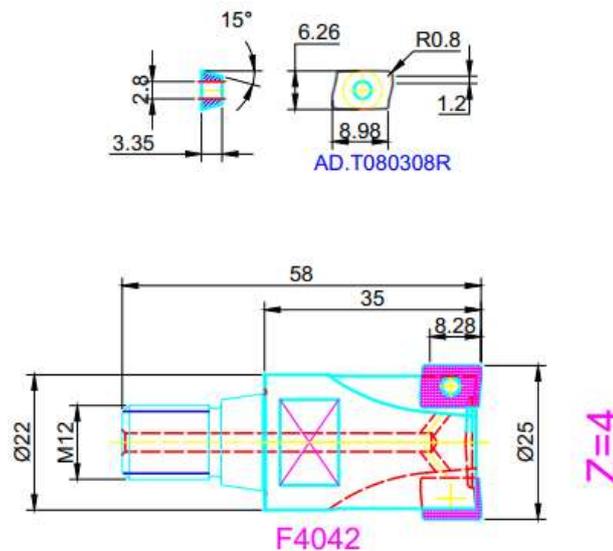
Milling tool F4042.T22.025.Z04.08
